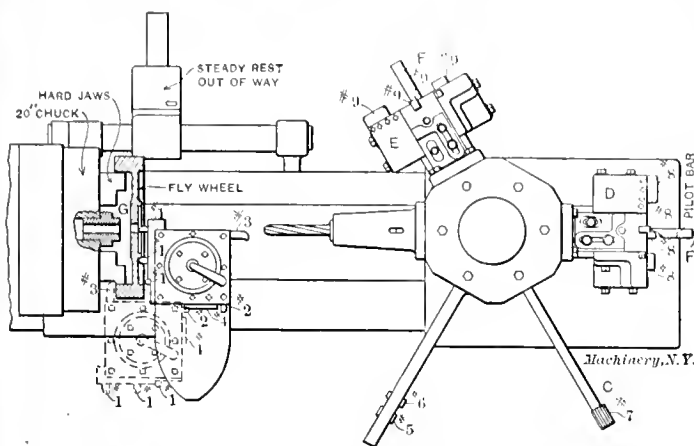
Finishing a Fly-wheel in the Libby Turret Lathe First part of First Operation.
